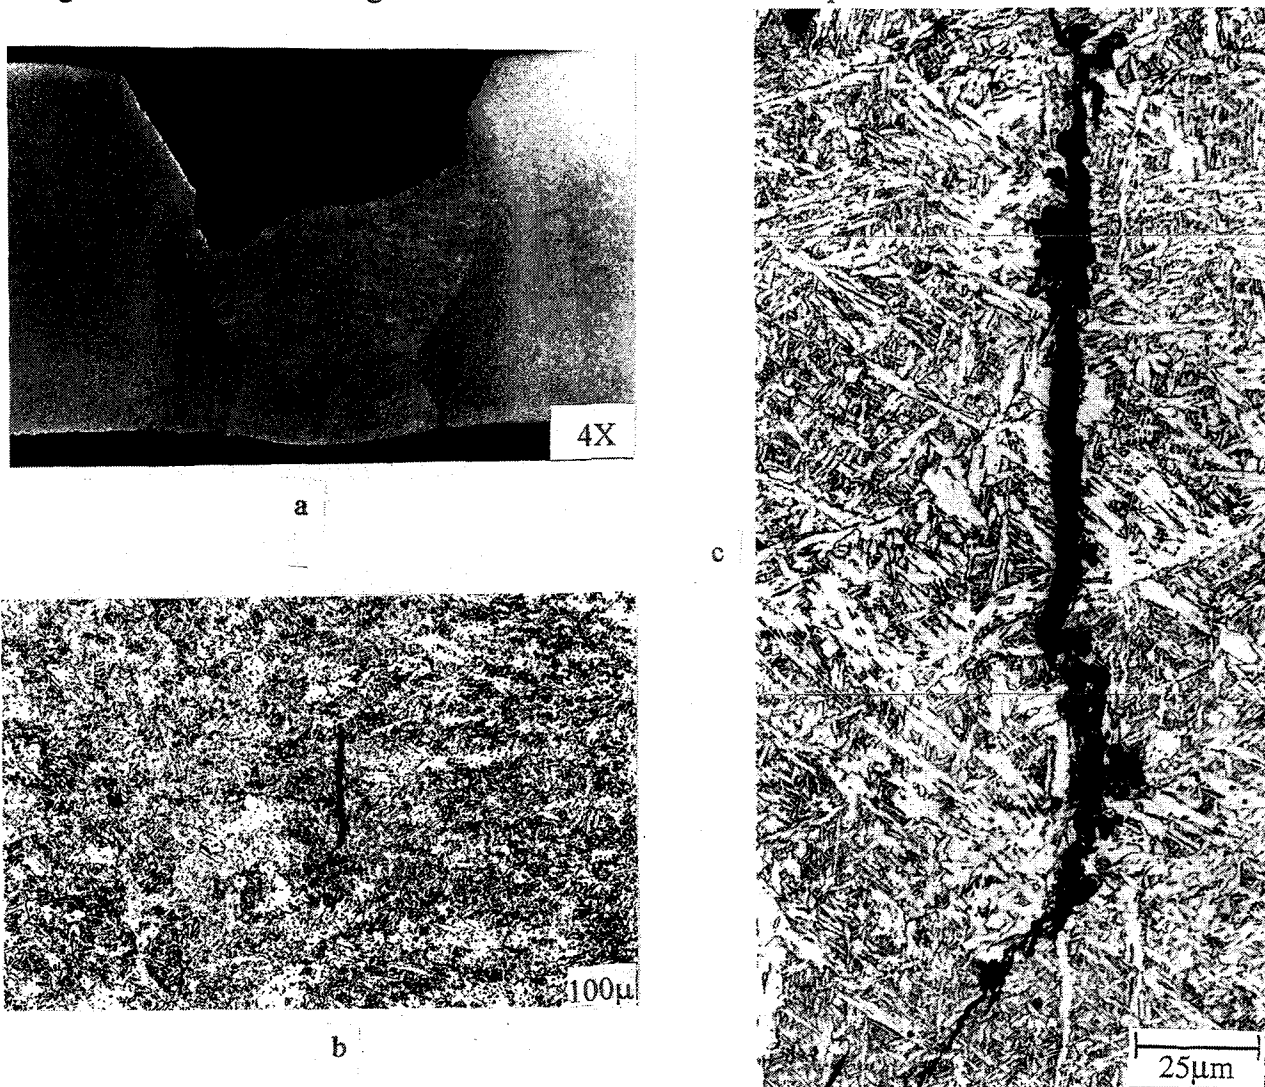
(a) Macrophotograph (b) and (c) Enlarged view of crack at weld centre using E 9010 electrode C.
